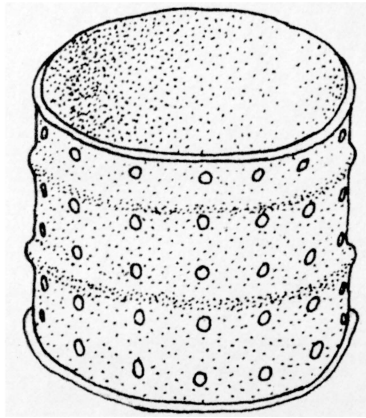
FIG. ① CYLINDRICAL, ONE PIECE FLASK FOR TEST MOLDS.
